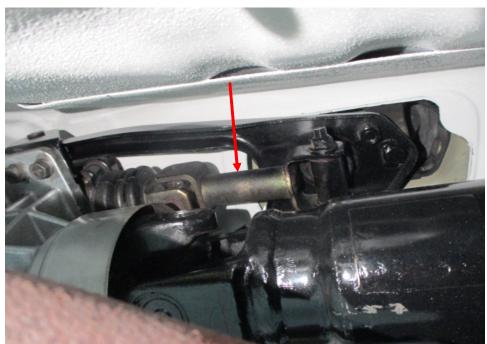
shows the gear selector shaft (arrowed) from the transmission assembly to the gear shifter of the Motor Car. The gear selector shaft was observed to be securely fitted to the underside of the Motor Car. This gear selector shaft connects to the gear shifter in the interior compartment of the Motor Car through the floorboard.
